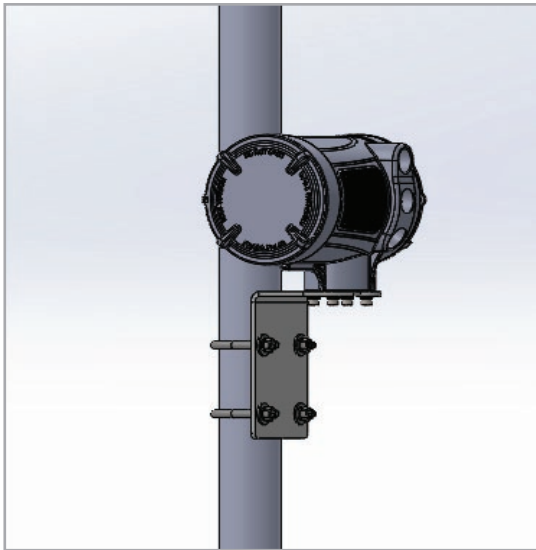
Aluminum J-box mount to 2" pipe using supplied hardware kit (stainless steel install will be identical)
